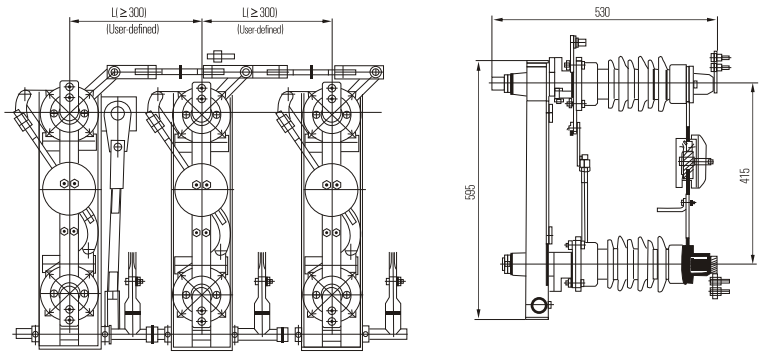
CGW4-12D/630 tri-pole assembly drawing
